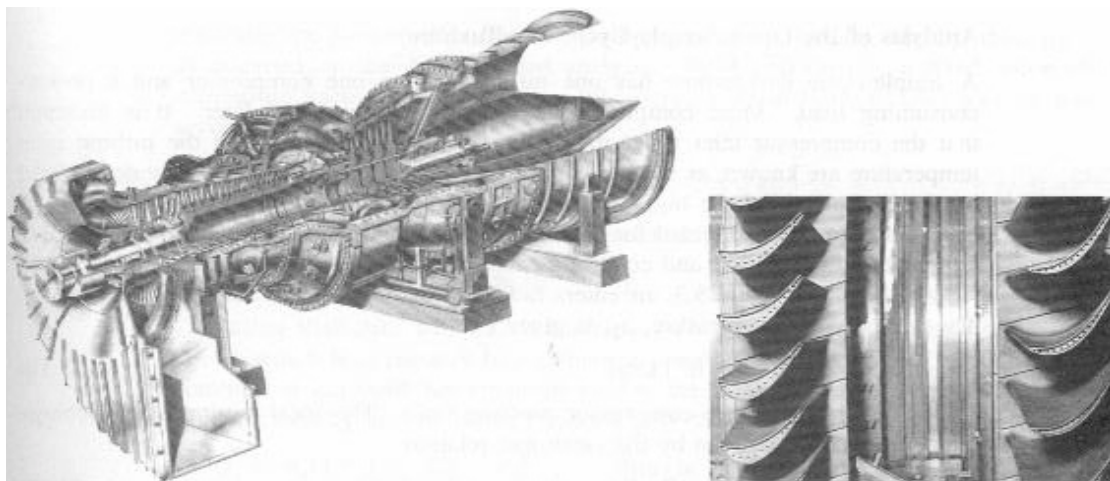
Cutaway of single-shaft combustion turbine. Air inlet and power takeoff flange are on the left, and combustion gas exit is at the right. The inset shows holes in the ends of the turbine rotor blades for exit of blade-cooling air. (Courtesy of Westinghouse Canada.)
